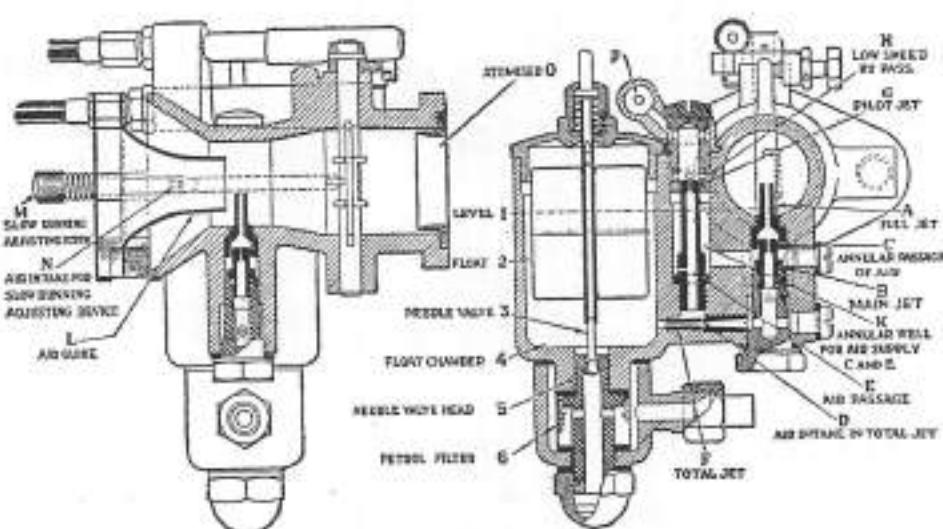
SECTIONAL VIEWS OF BOWDEN CARBURETOR
